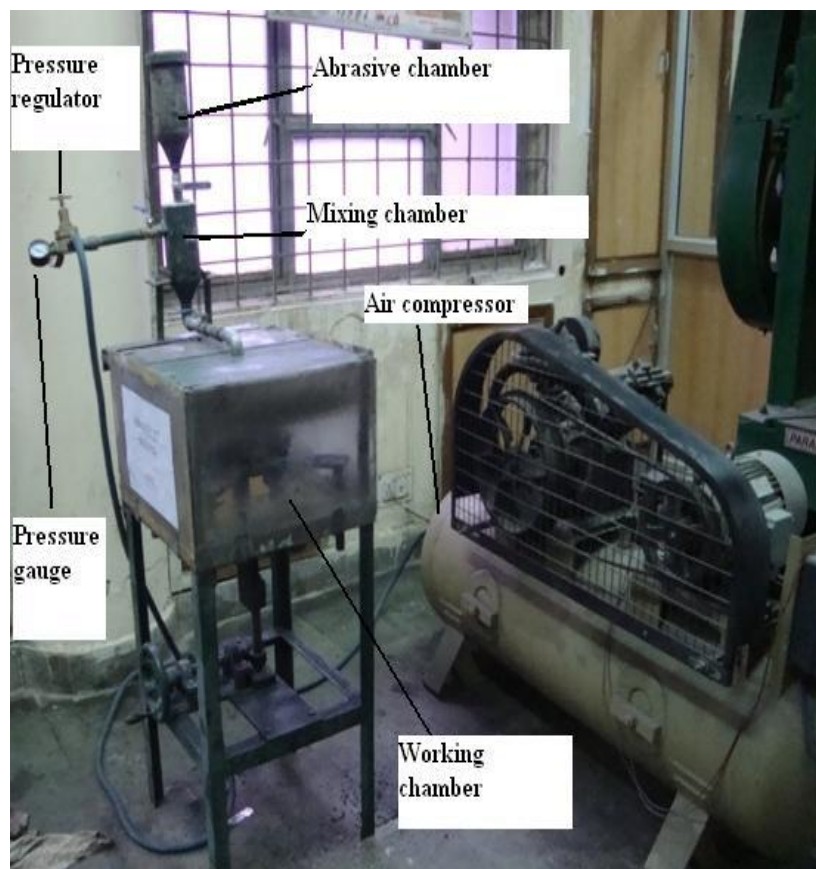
Abrasive Jet Machine Metal forming lab Department Of Mechanical Engg.DTU
